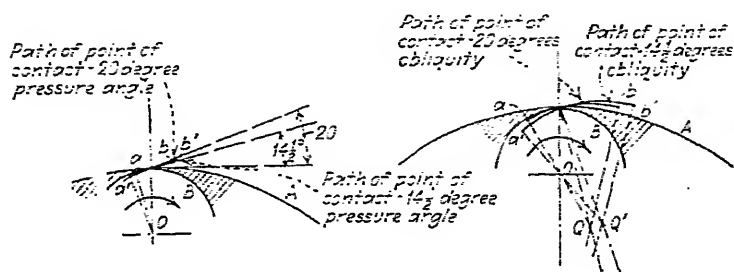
Comparison of paths of tooth contact in involute and Williams systems of internal gearing.
